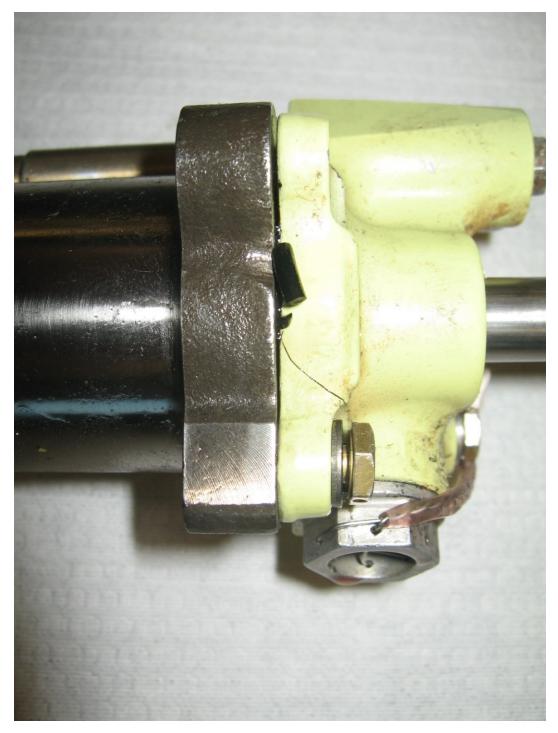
Pedal damper check valve housing installed on the pedal damper. (image courtesy of Sikorsky)
